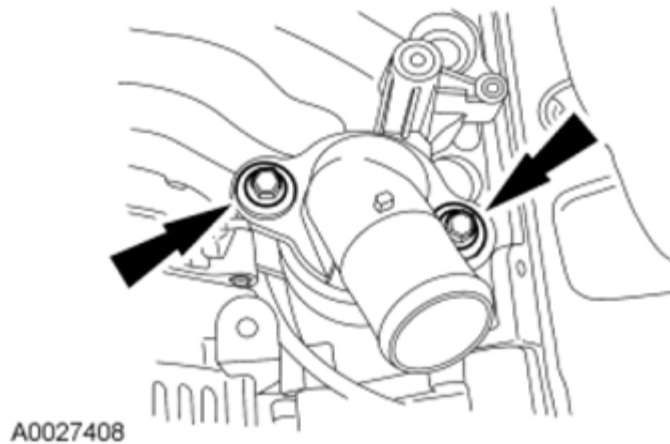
Locating Coolant Outlet Adapter Mounting Bolts
